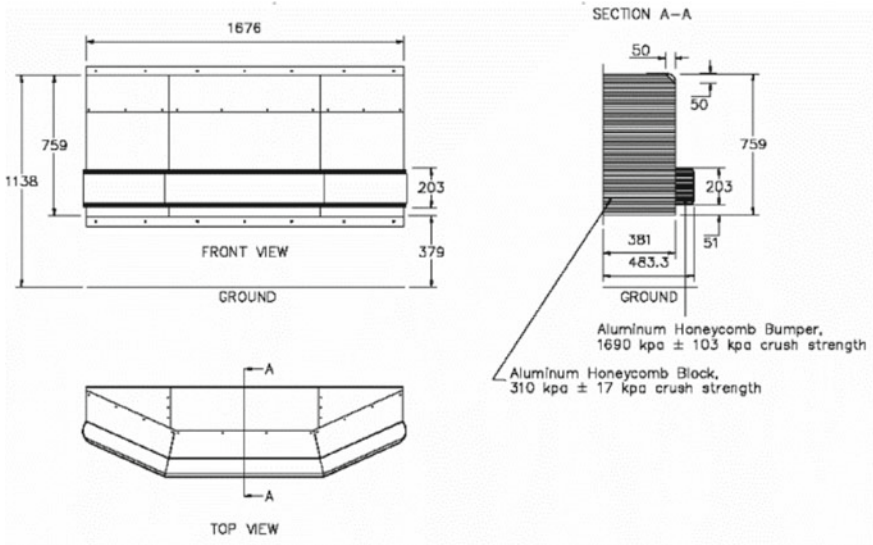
Moving deformable barrier elements and dimensions in 2D drawing
